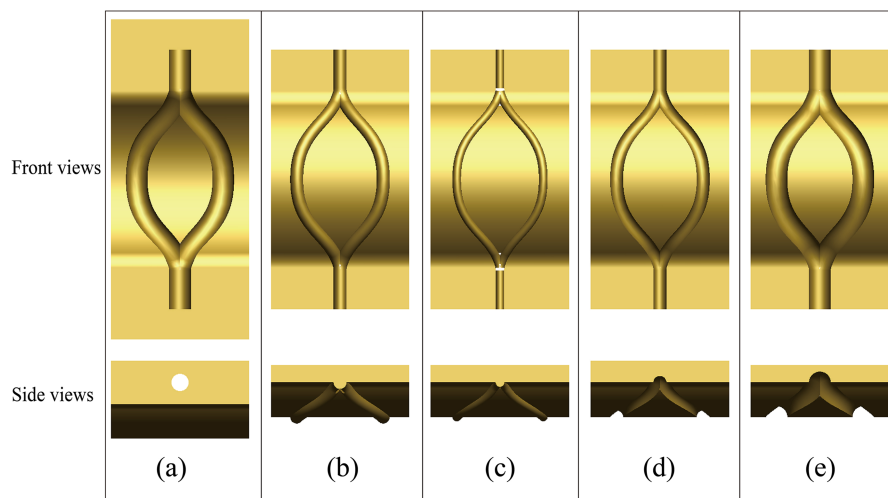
The front views and side views of the five molds: (a) mold 1; (b) mold2; (c) mold3; (d) mold4; (e) mold5.
